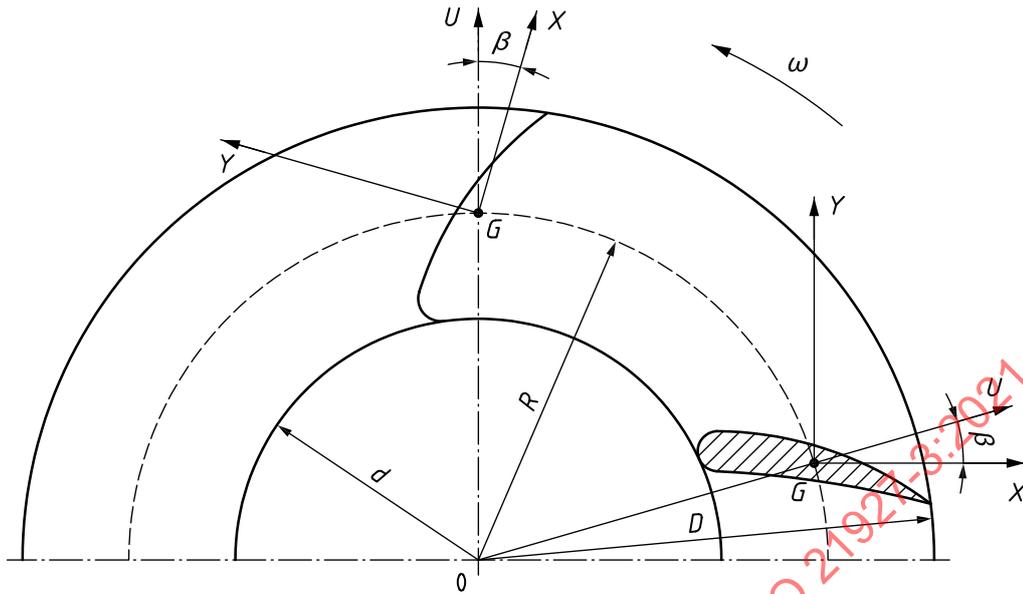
Centrifugal impeller, calculation of centrifugal forces about a principal axis
